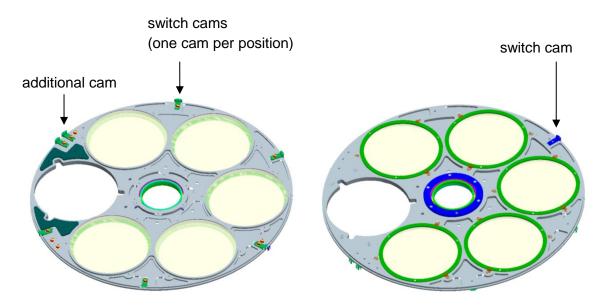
The filter wheel disc front side (left) has one cam per position, the rear side (right) has only one cam.
